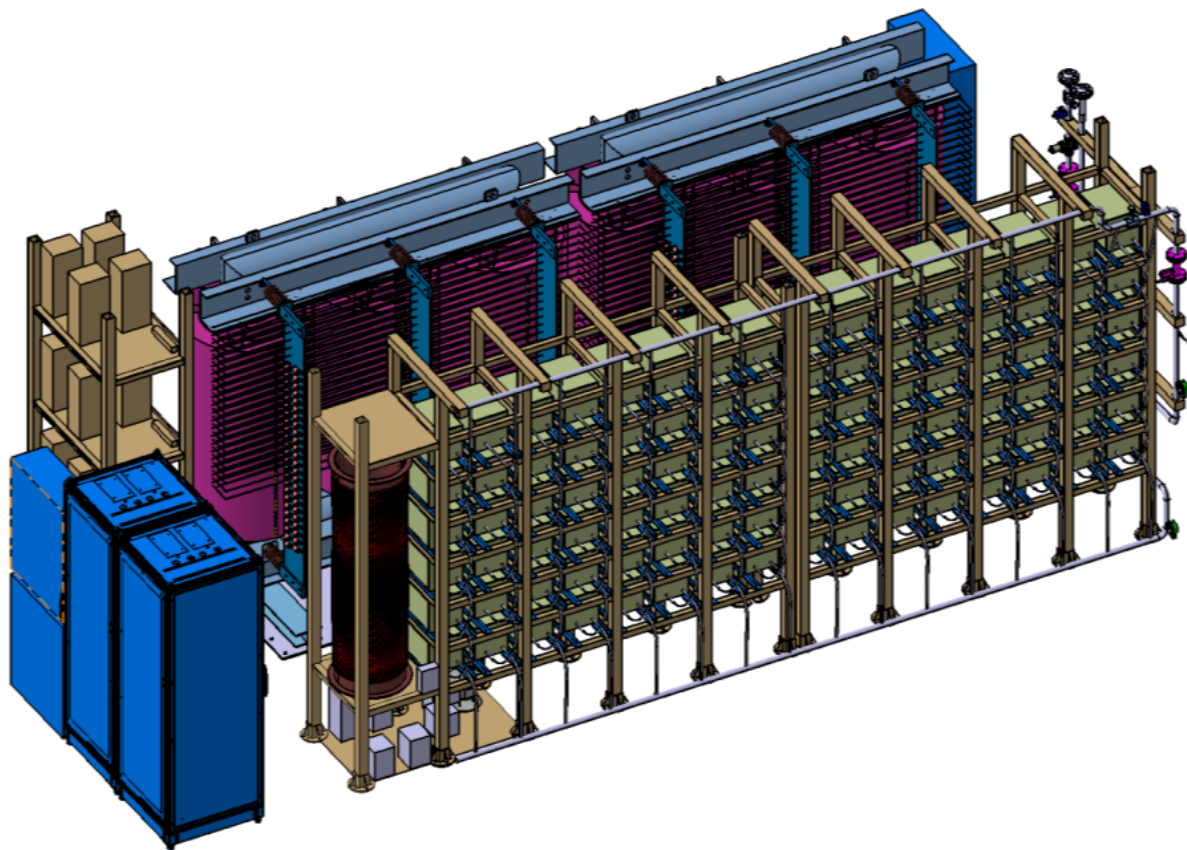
HVPS system layout from ENOVIA at B15-L1 of IN-DA
